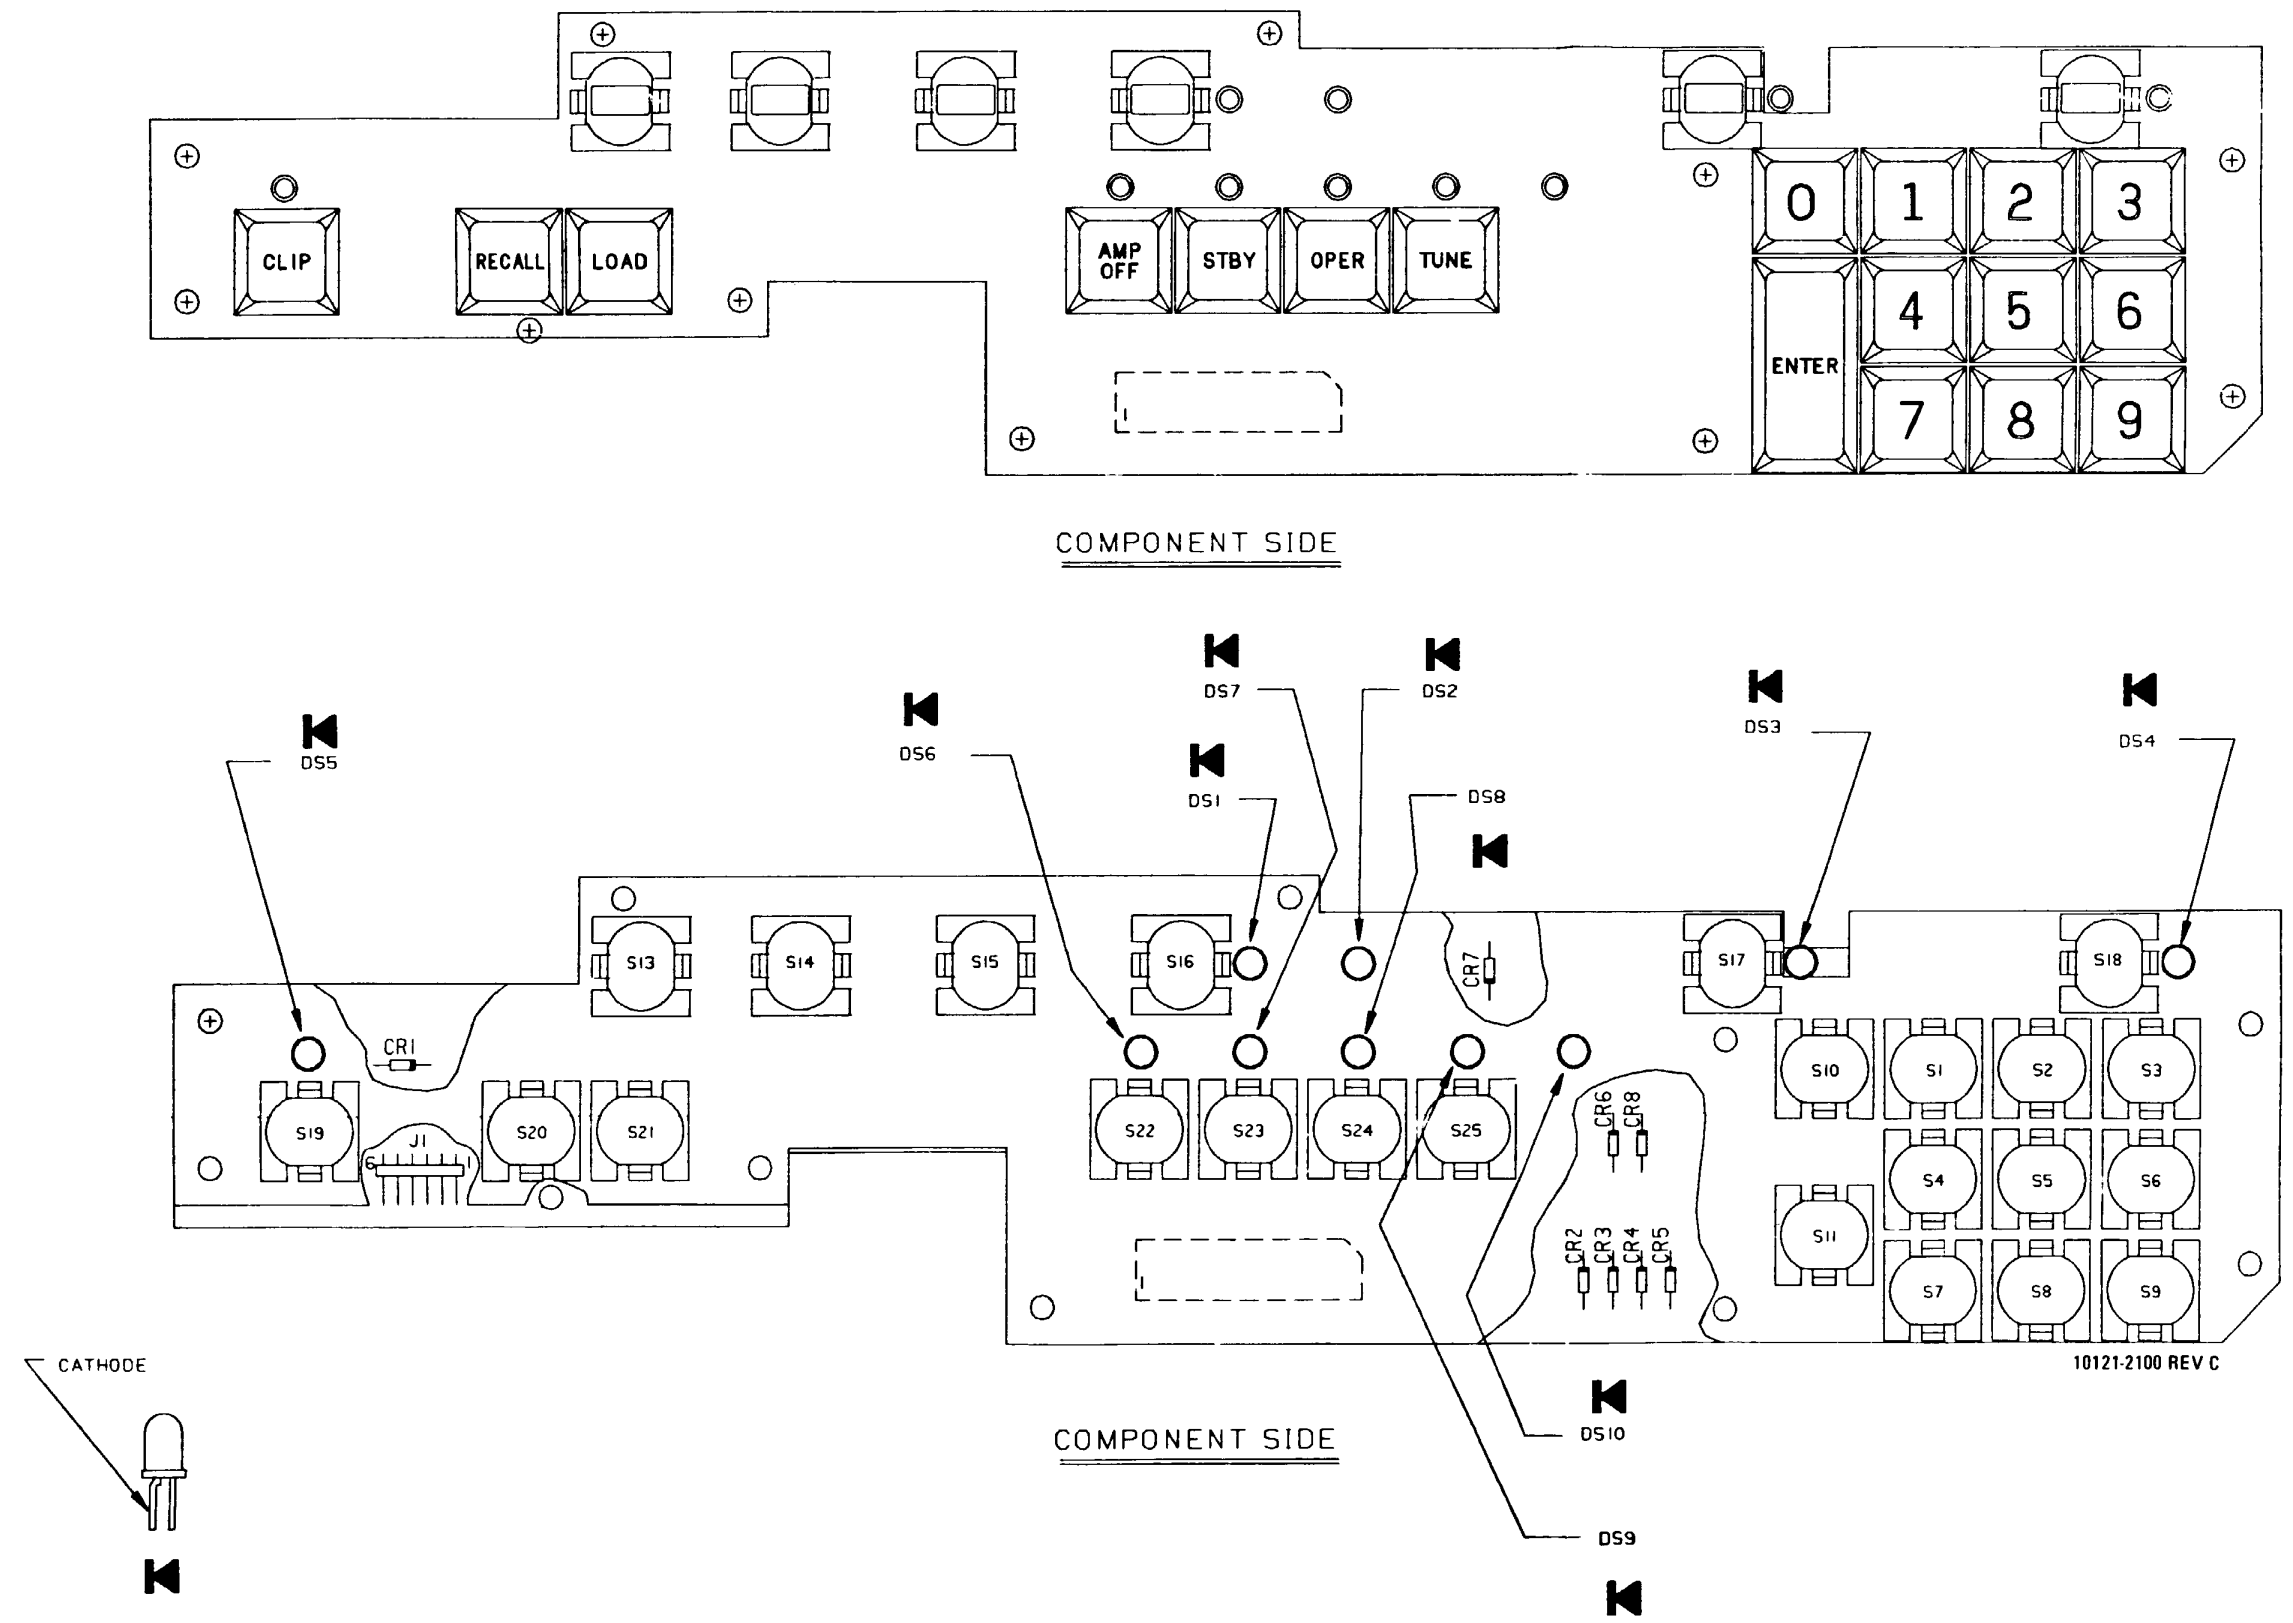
Front Panel Switchboard Assembly A13A1 Component Location Diagram (10121-2100 Rev. C)
